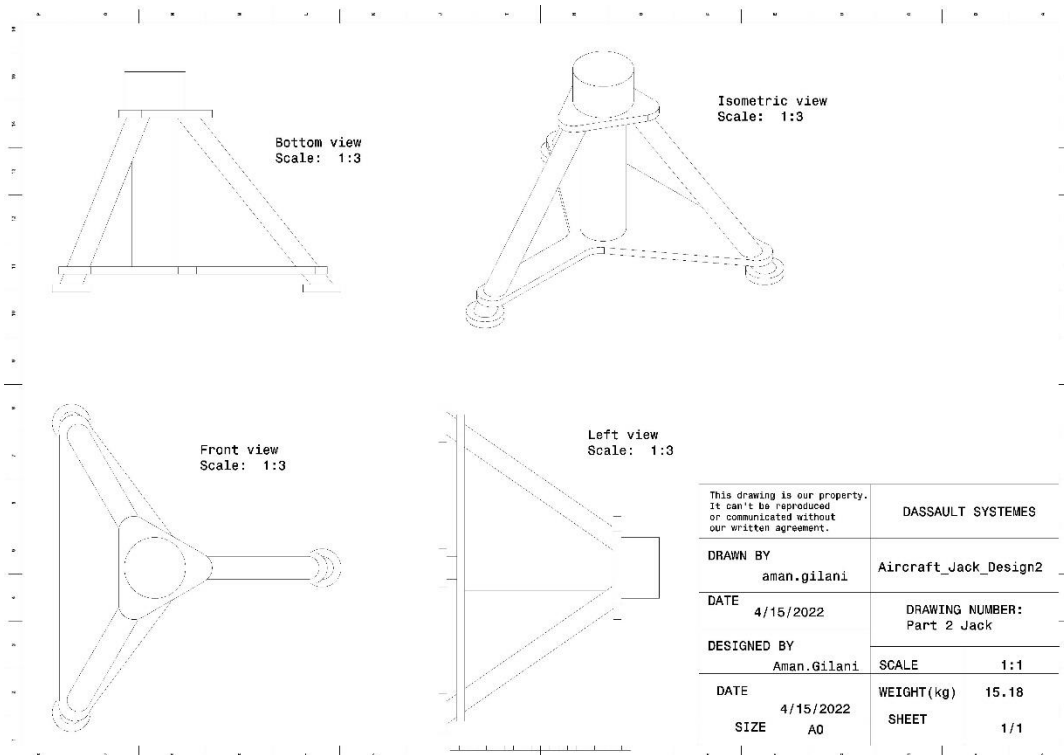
Aircraft Jack, Engineering Drawing - Second Iteration.
